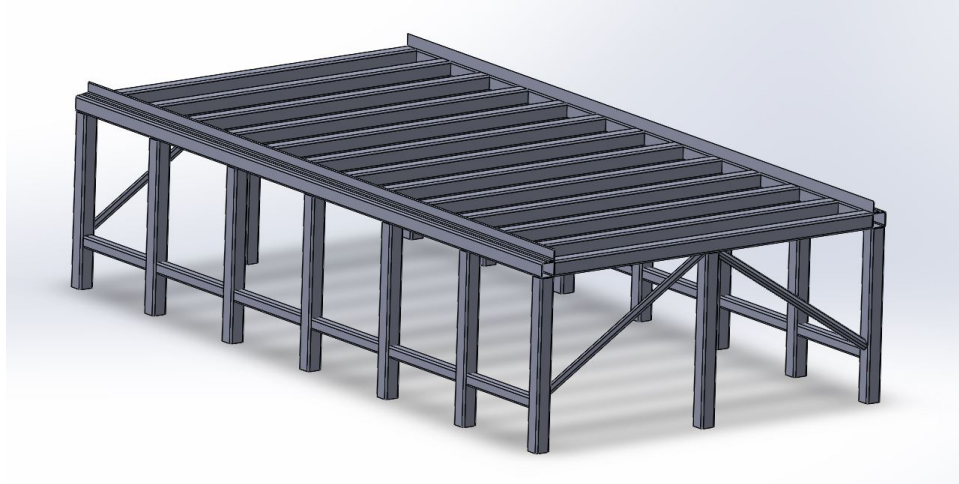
CAD Drawing of Aluminum Frame for Glass
